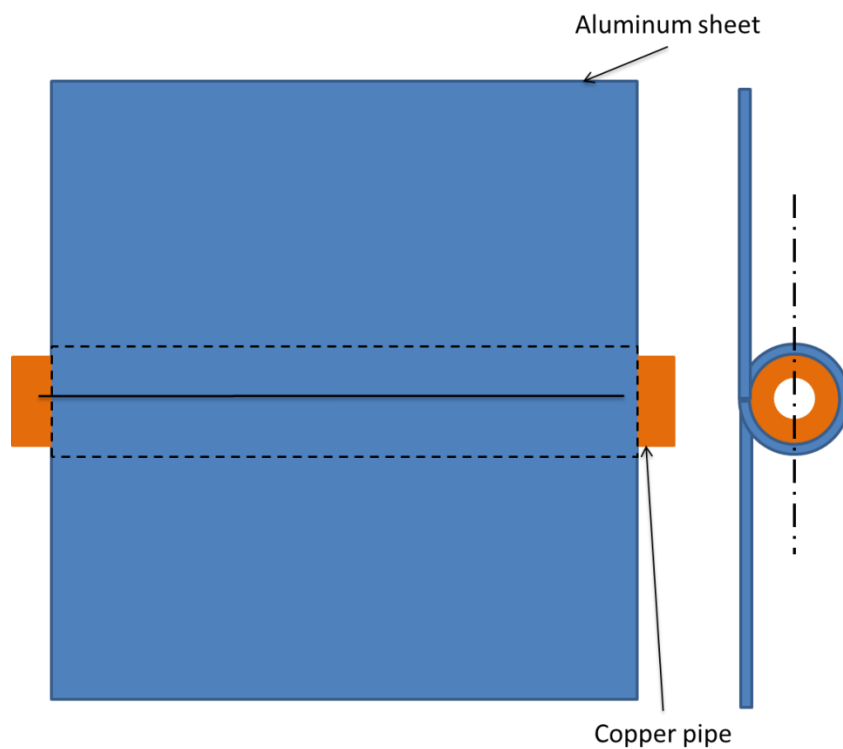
Copper pipe manually crimped and riveted between aluminum sheet
